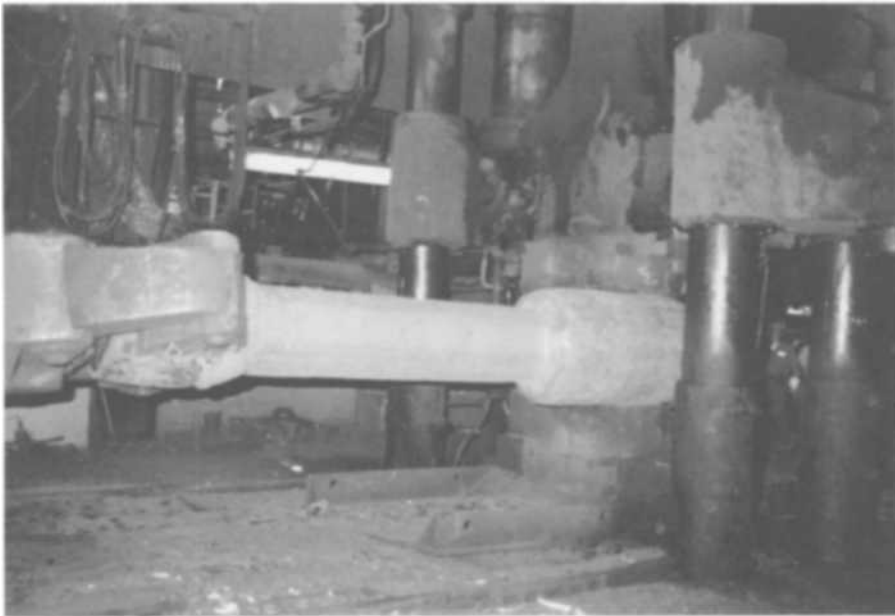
Example of straight forging in a 3.5 Ni-Cr-Mo-V alloy steel according to ASTM A 723. This was the completion of the forging shown being upset in Fig. 5.2, and was part of the anchor system for a tension leg platform (TLP) in the North Sea.
